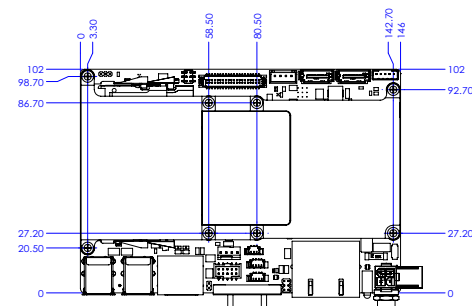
MIO-5393 Mechanical Drawing (with Heat Spreader)
